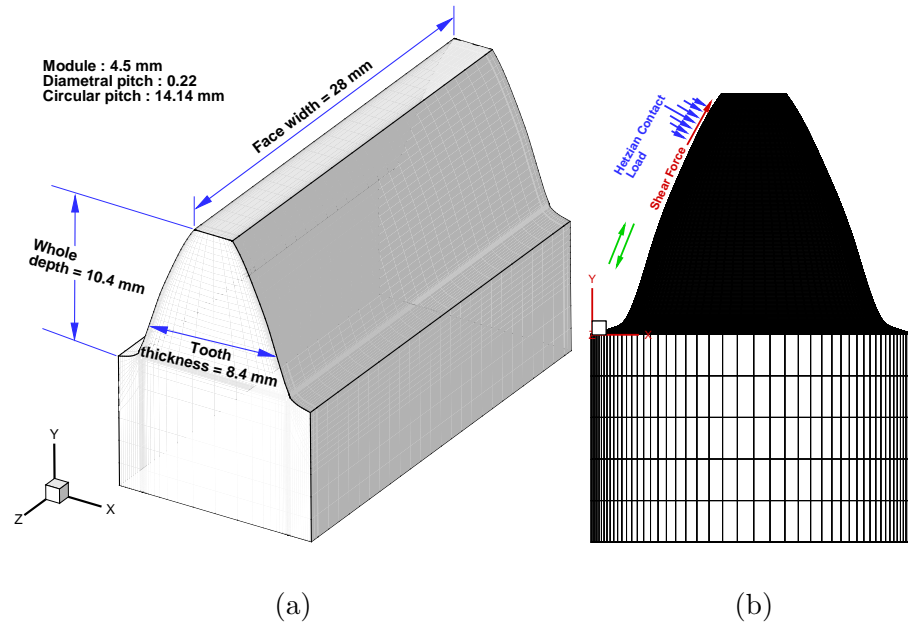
(a) Geometry of the gear tooth used in this study, (b) Typical finite element mesh for an undamaged gear tooth.
